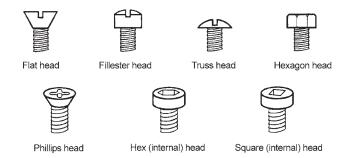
Typical head forms for bolts and screws. Source: Ref 8.5,
